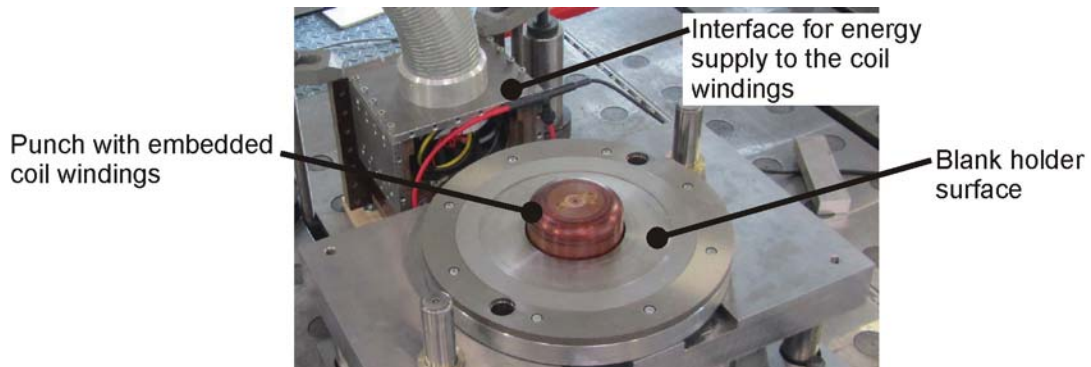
The electromagnetic punch assembled to the deep drawing equipment
